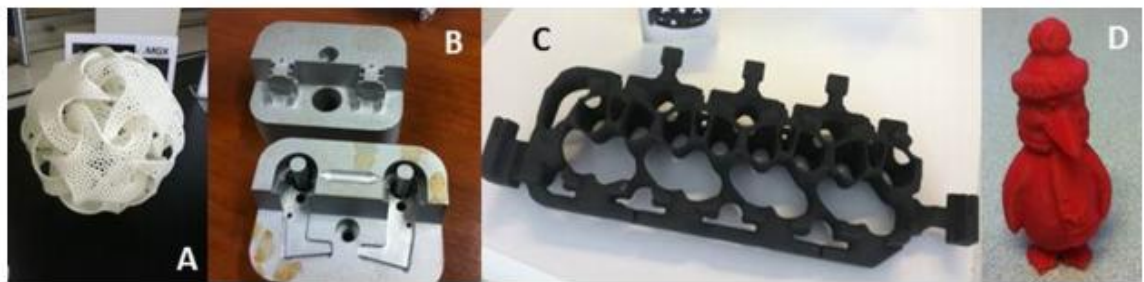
Shows examples of AM products. (A) An intricate ornamental piece printed from nylon-11 material using selective laser sintering. (B) Laser based powder bed fusion 3D printing process for injection molding dies made of stainless steel. (C) Binder jetting process for 3D printed automotive cylinder head water jacket sand core. (D) A logo printed using a desktop material extrusion printer [44].
